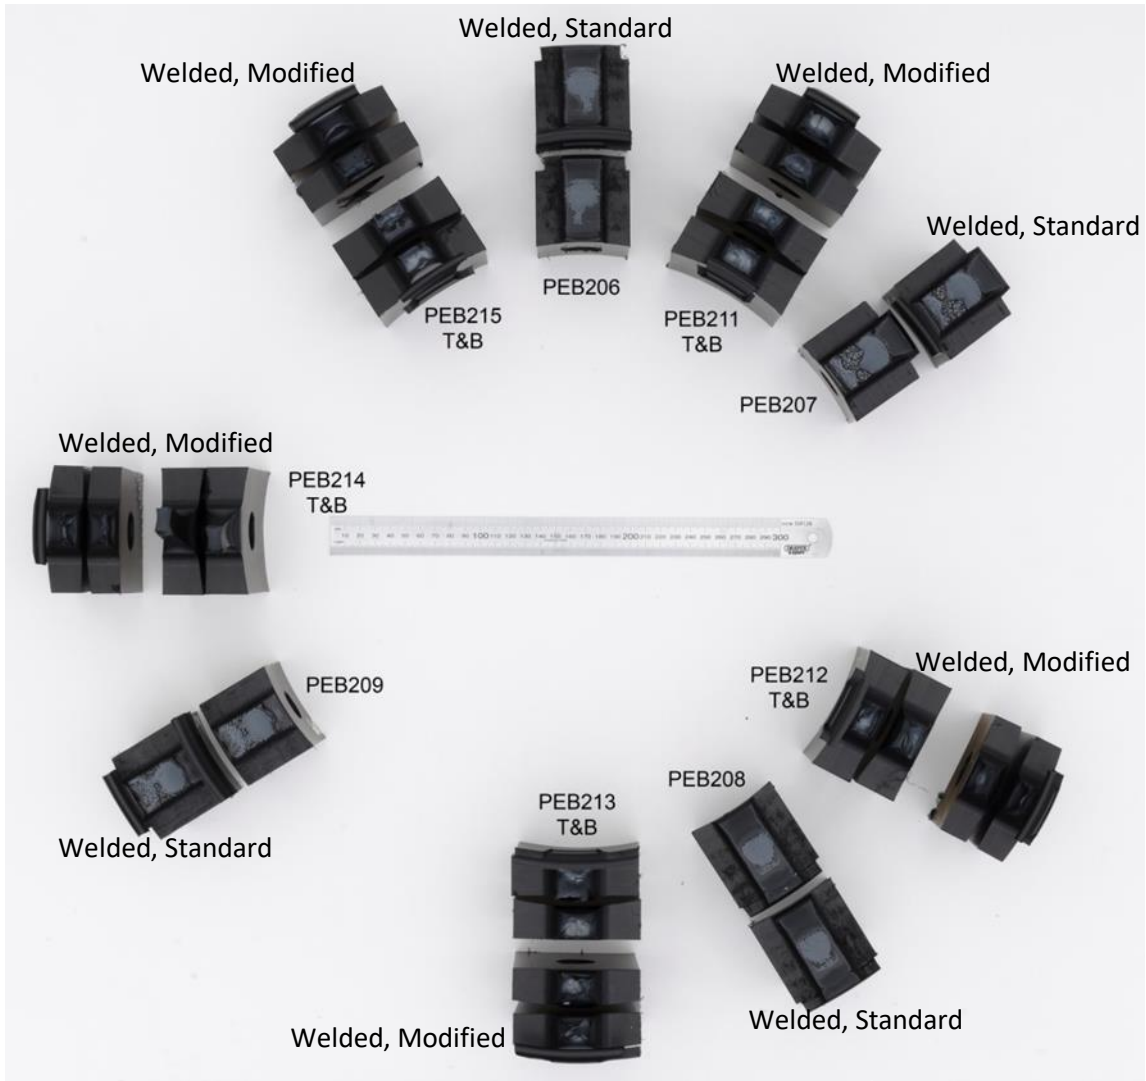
, Fracture surface for welded 500mm OD pipe SDR 11 using standard and modified geometry
